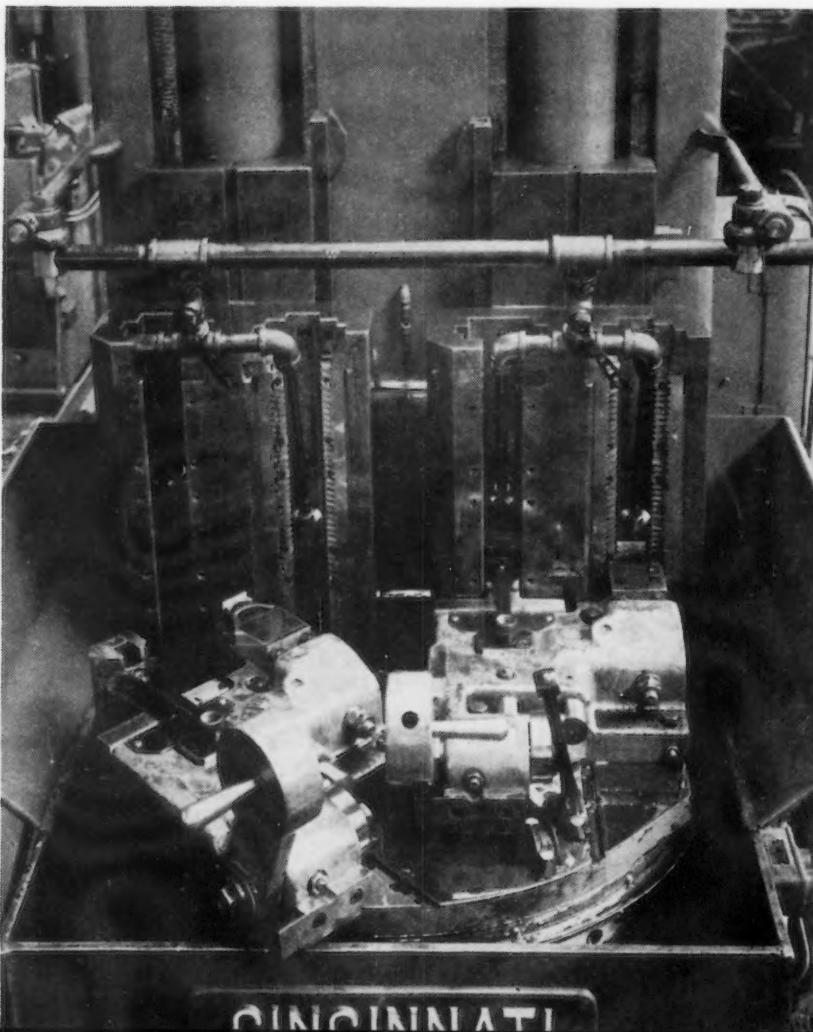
Set-up for finishing the side or crank faces of both the connecting rod and cap simultaneously.
